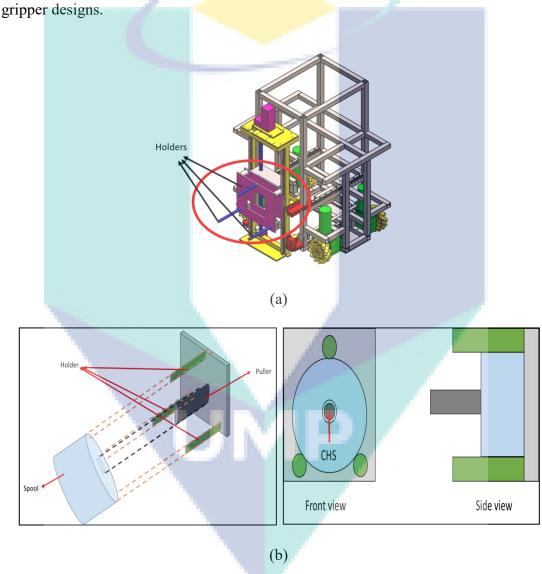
Mechanical design of the robot (a) Full mechanical design of the robot without its camera and puller (b) Illustration design for the puller and holders grasped the spool in front view and side view
